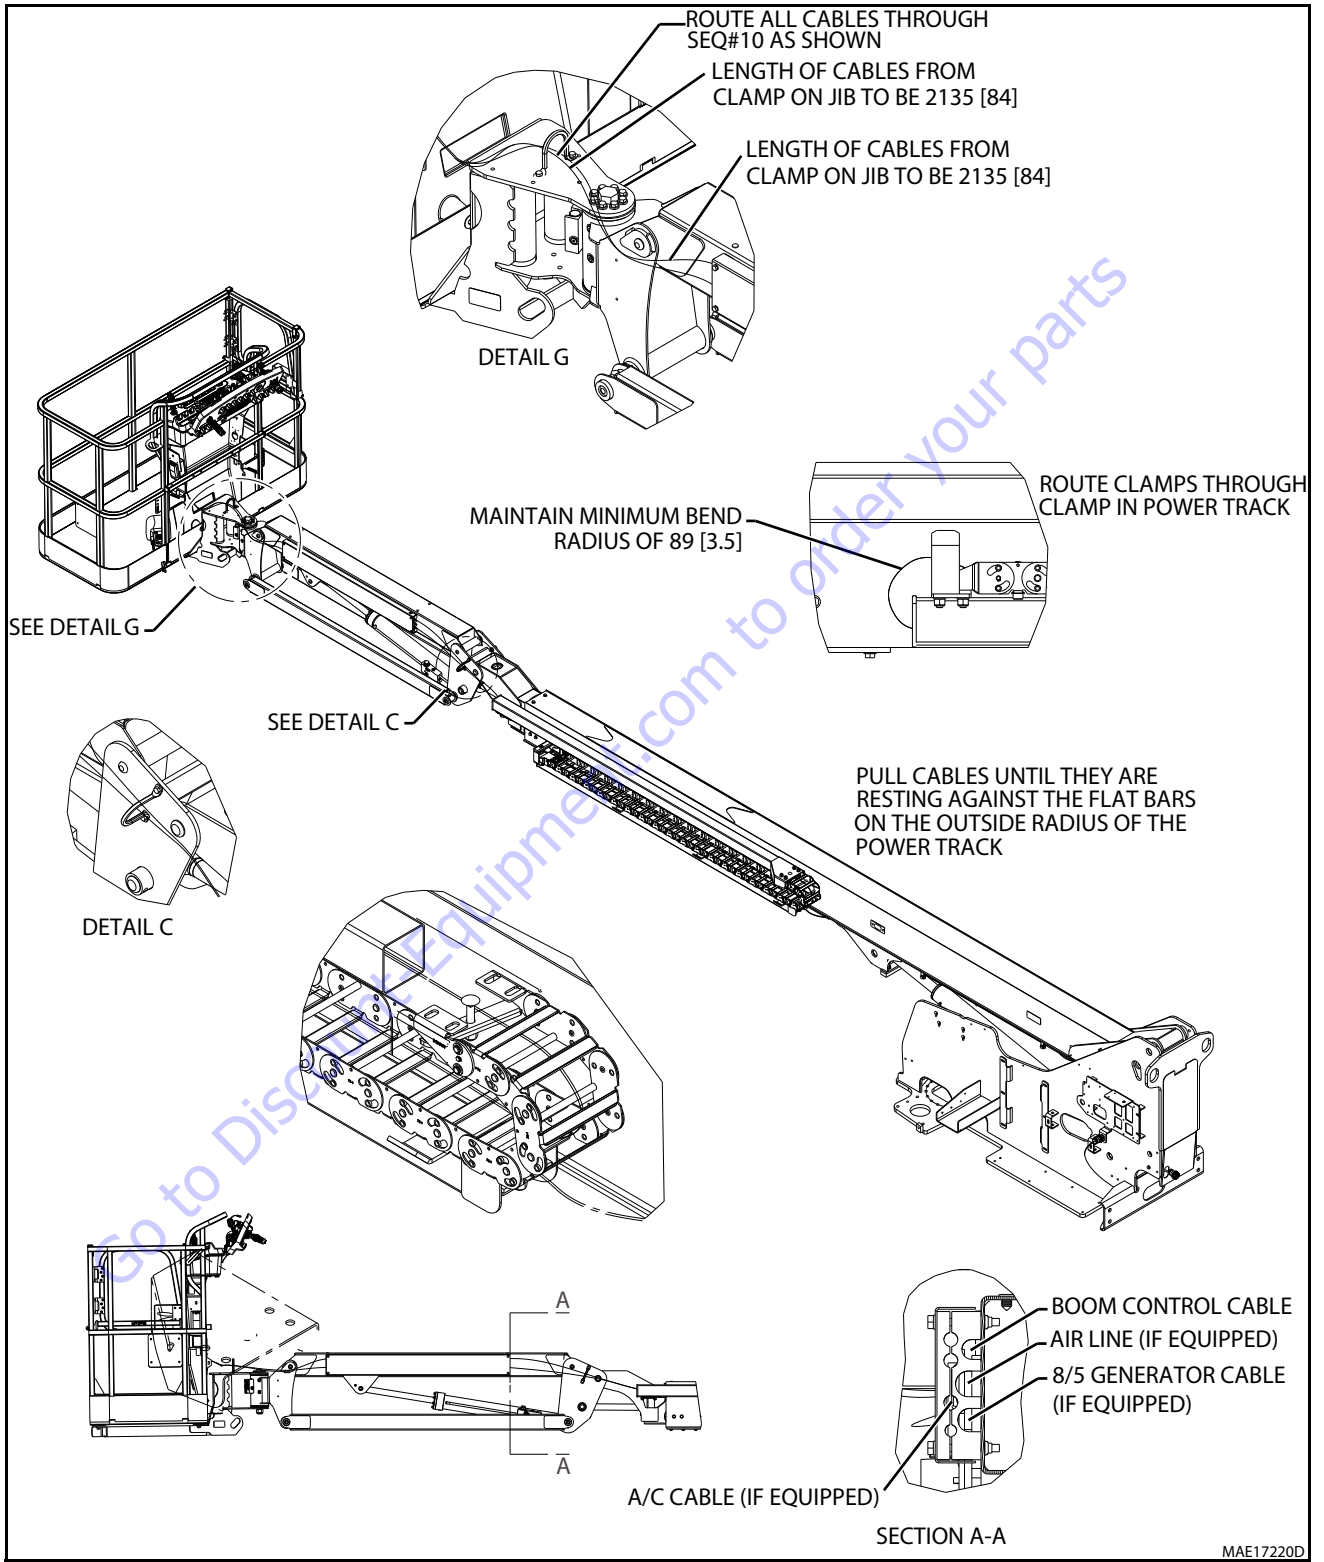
Cables and Clamps Installation - 4605JC (Sheet 1 of 2)
